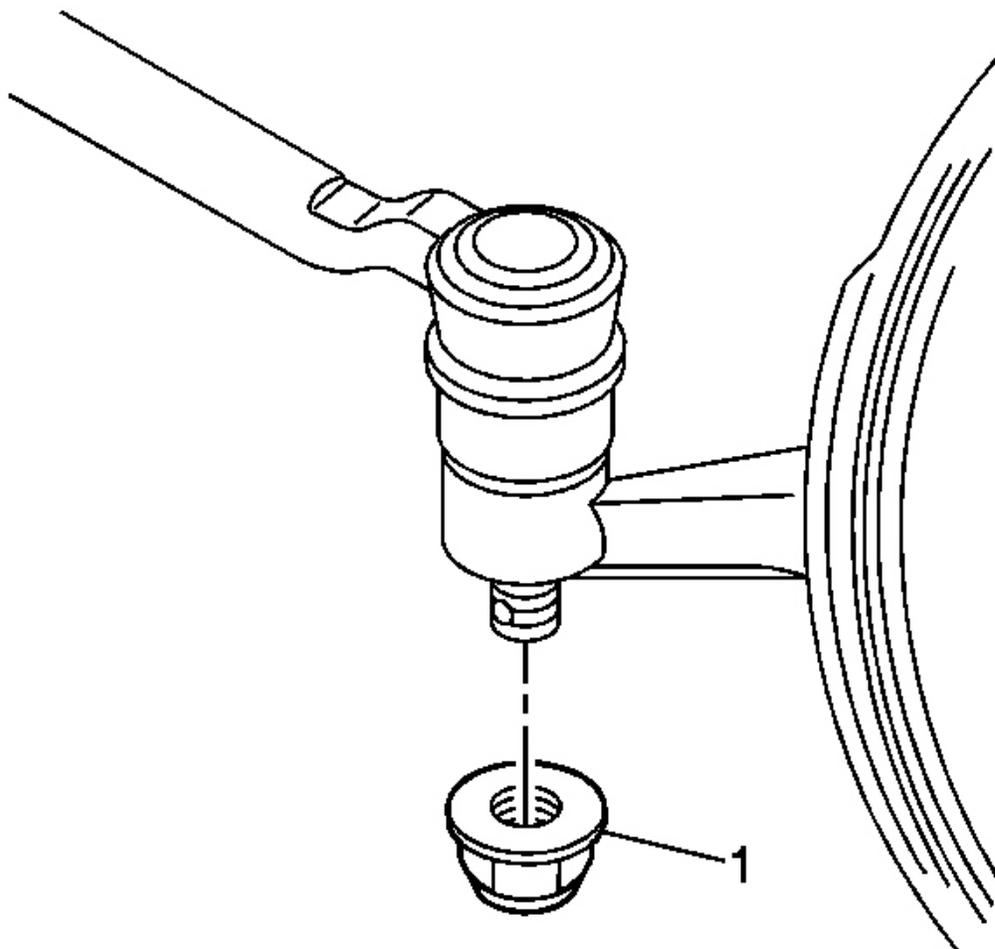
Identifying Steering Linkage Outer Tie Rod Nut
